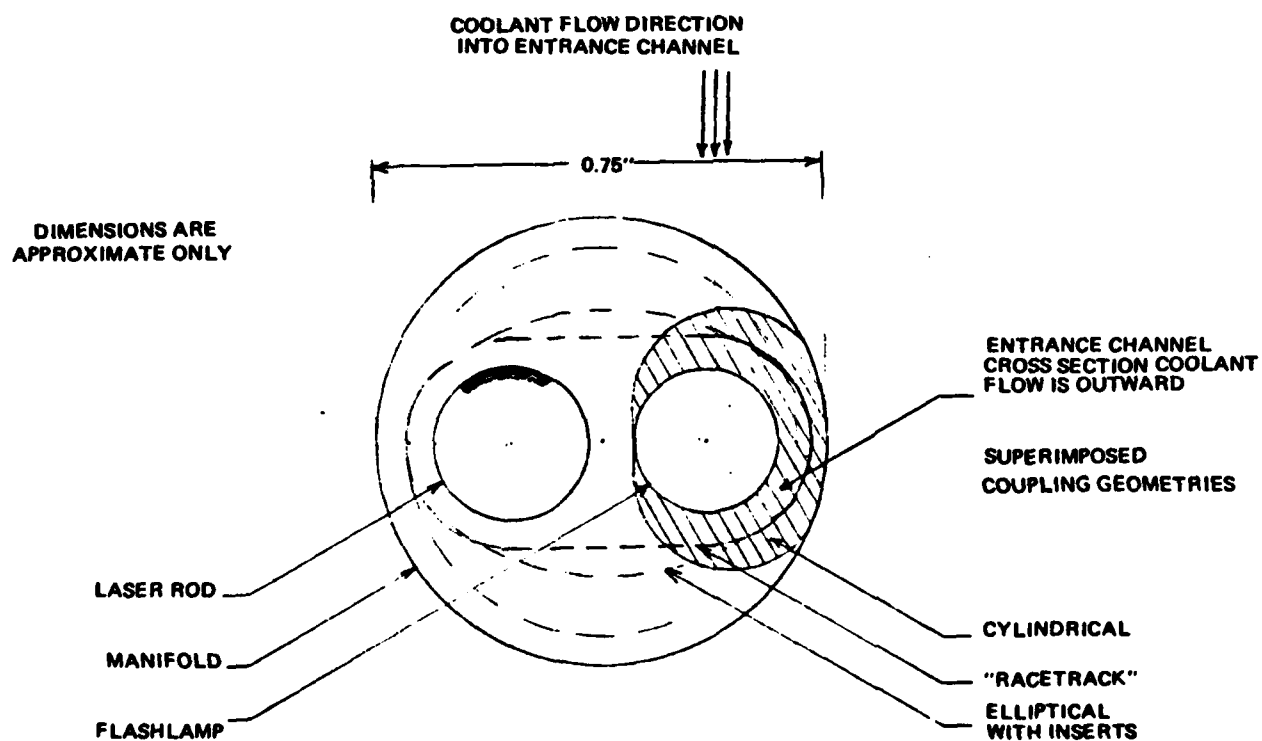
Flashlamp-Laser Rod Coupling Geometries (including end-plate manifold layouts).
